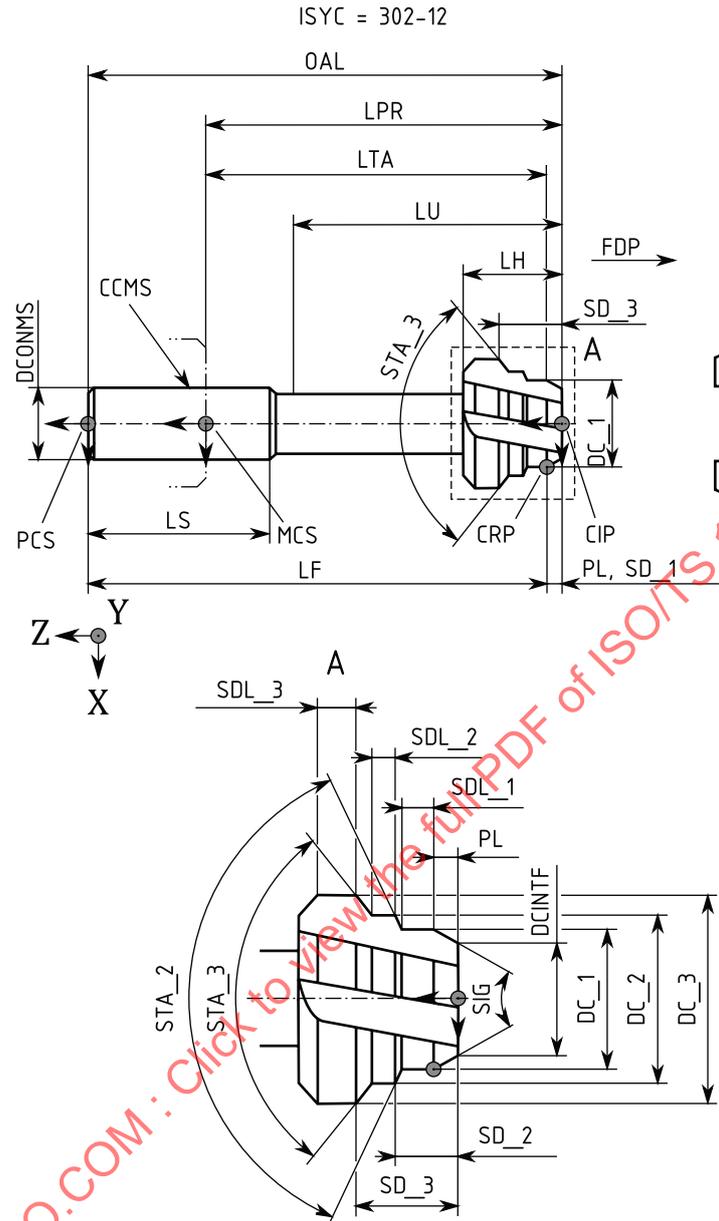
ISYC 302-12 - Stepped countersinking tool, cylindrical shank, solid
